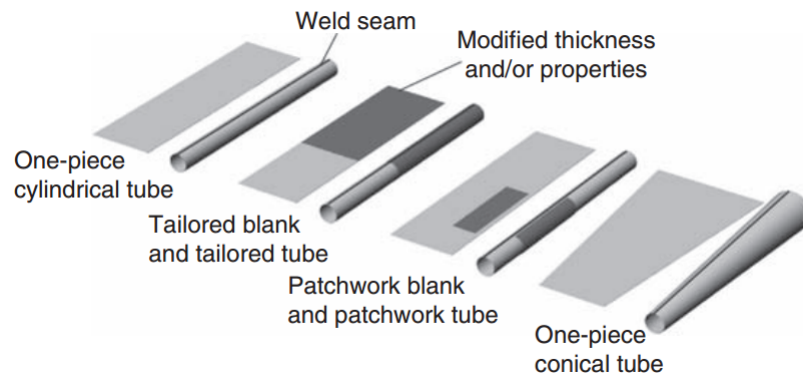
Examples of laser-welded tailored semifinished products [5].
